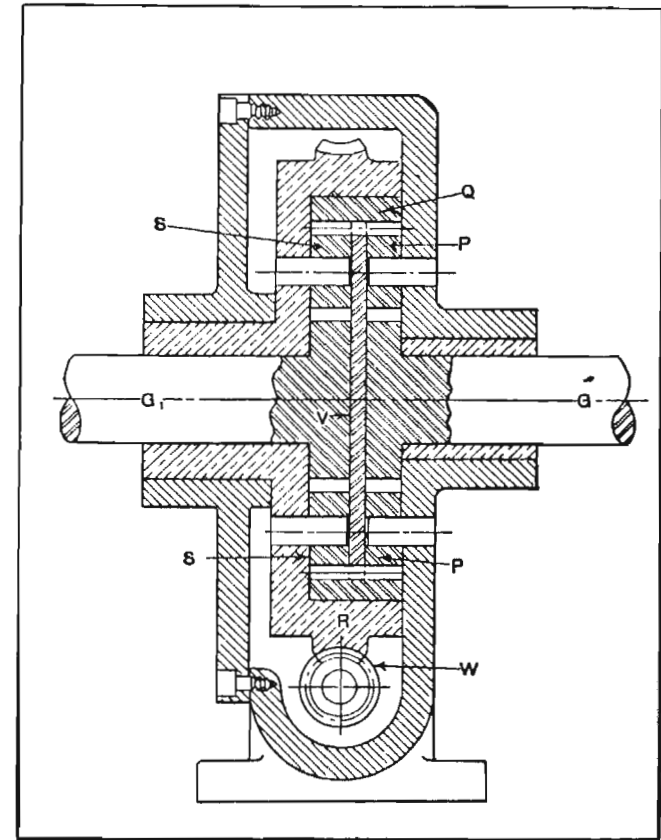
Sectional View of Differential Gearing of Eccentric Feed Mechanism
